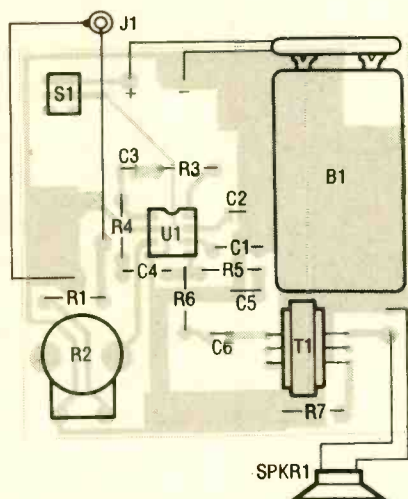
Solder the components to the board using this parts-placement diagram as a guide.
